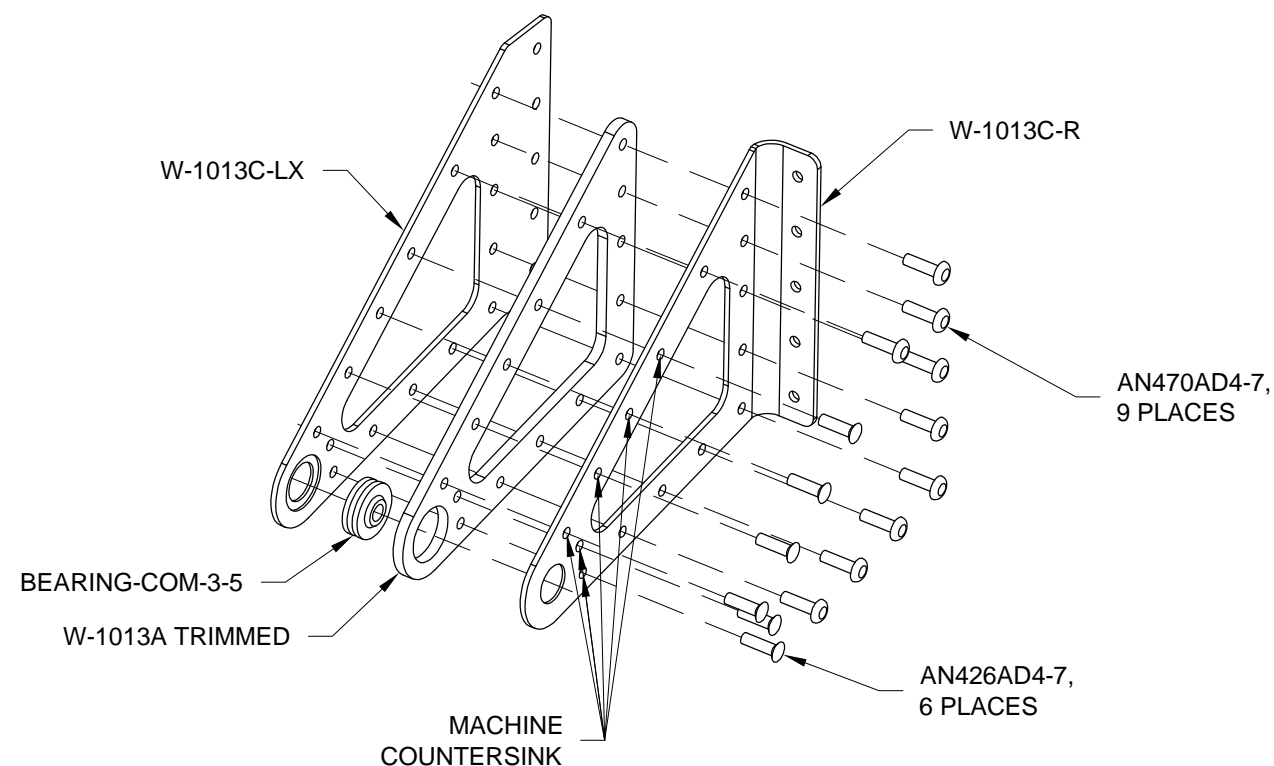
INBOARD AILERON BRACKET ASSEMBLY
